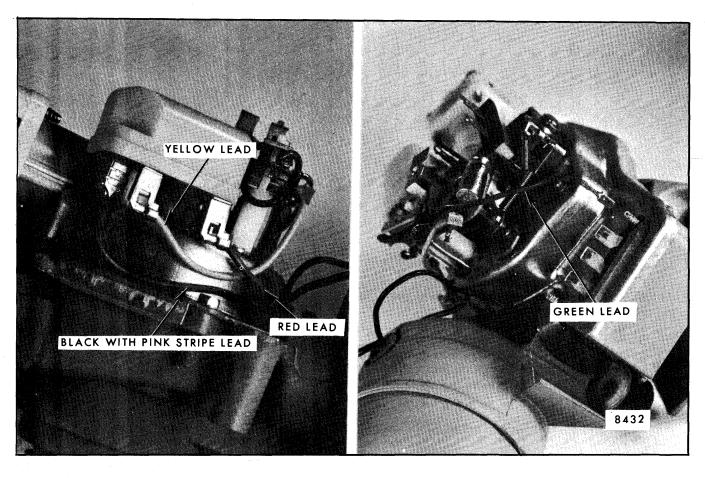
Modified Pulse Relay Terminals and Leads
